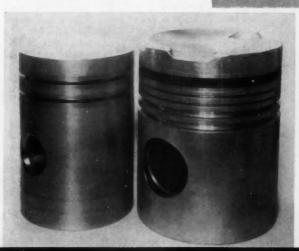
Two methods for improving ring land life of aluminum pistons. A ferrous ring groove insert is bonded to the aluminum in the piston on the right. Piston on the left has an aluminum alloy welded in the ring groove area and the grooves remachined.
